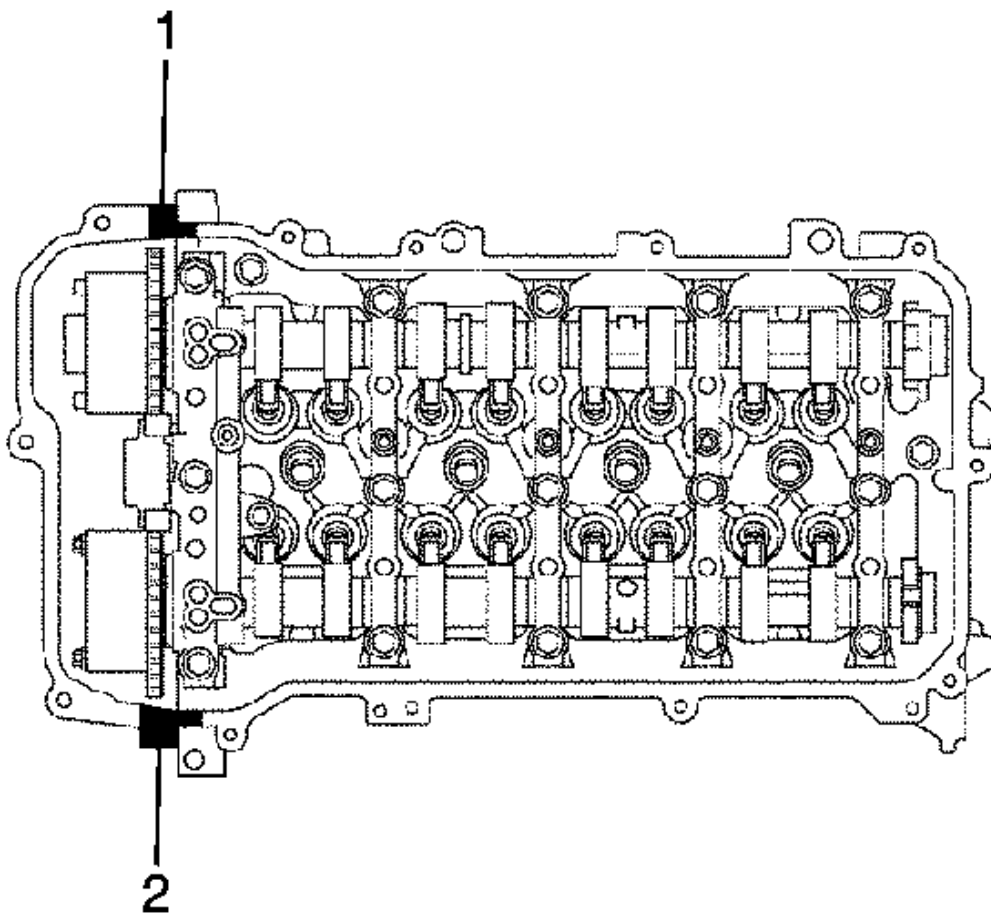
Identifying Cylinder Head Cover Sealant Locations
